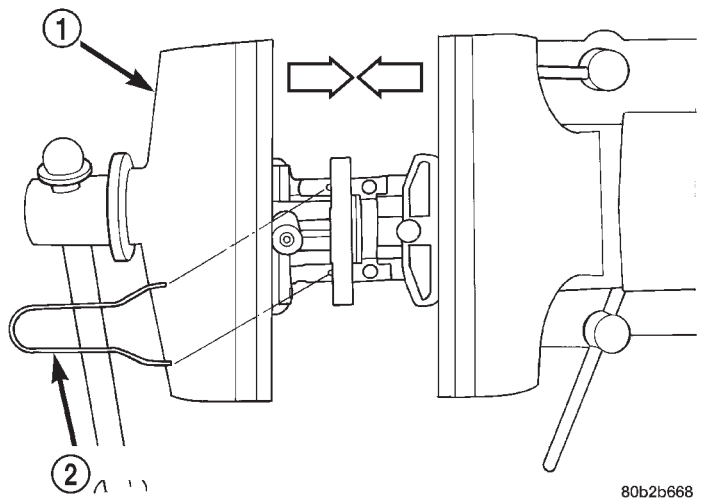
Locking Camshaft (Secondary) Chain Tensioner
